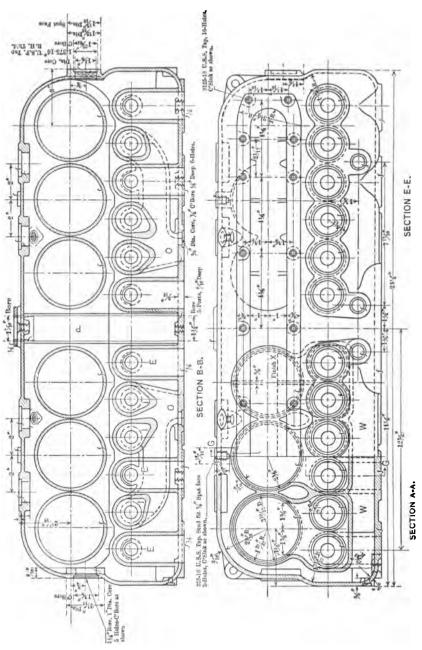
and 39a.—Continental Model 9N cylinder casting $3\frac{1}{2}$ " $\times 5\frac{1}{4}$ ".
